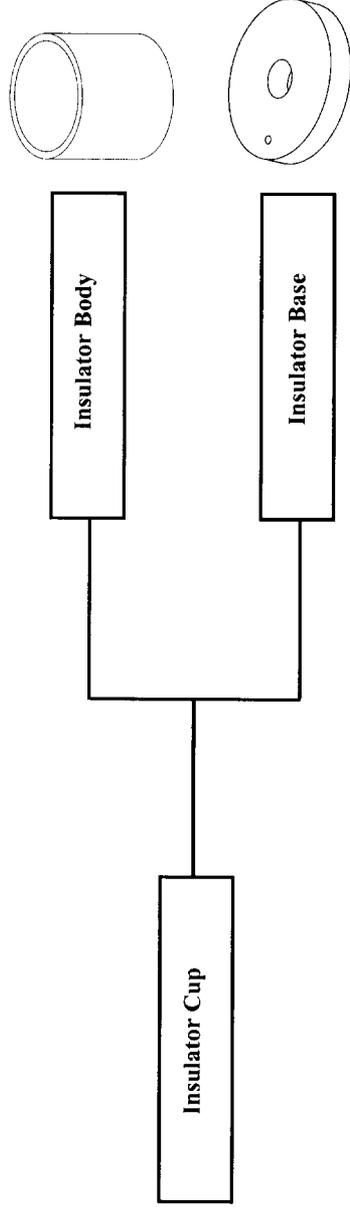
Exploded view of the components in the Insulator Cup Sub-Assembly.
